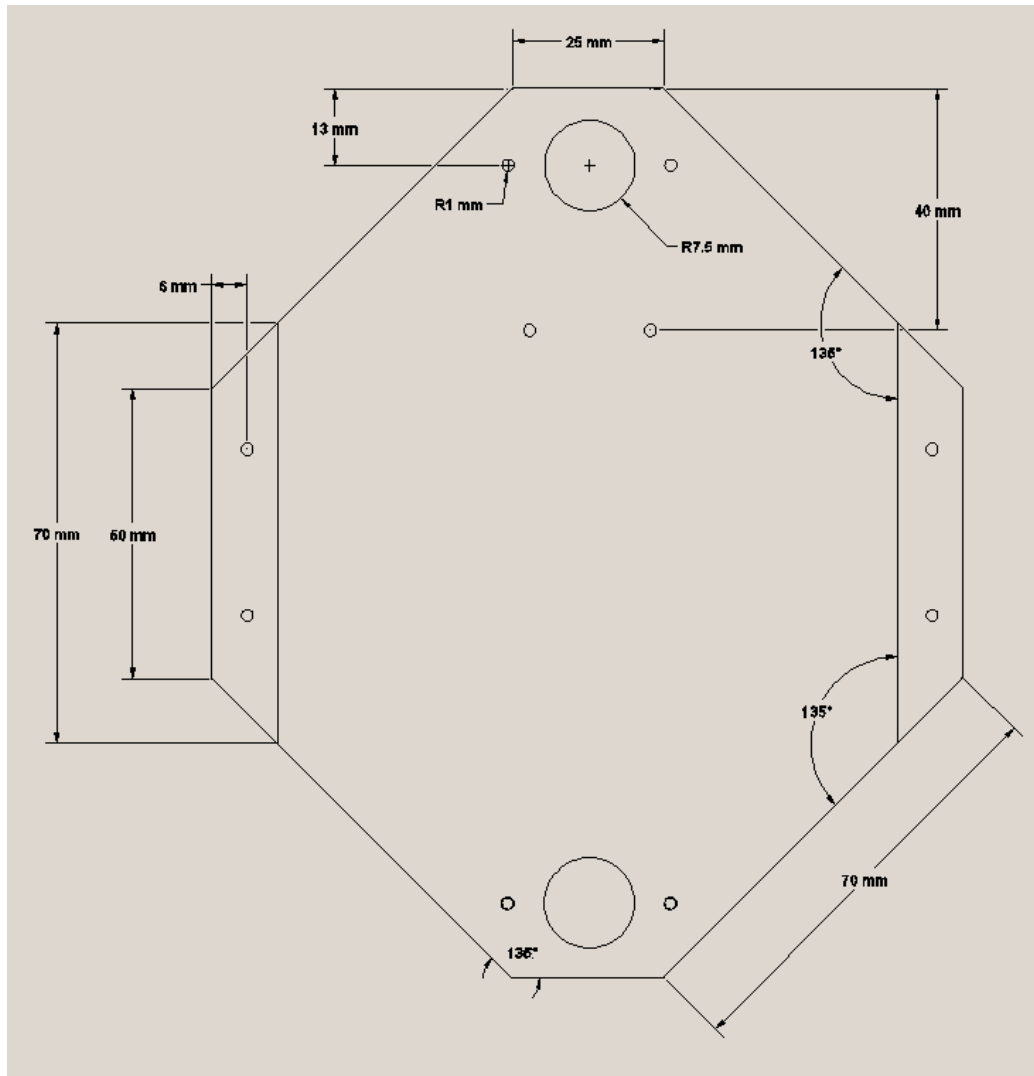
Micromouse Bottom Plate CAD Drawing
